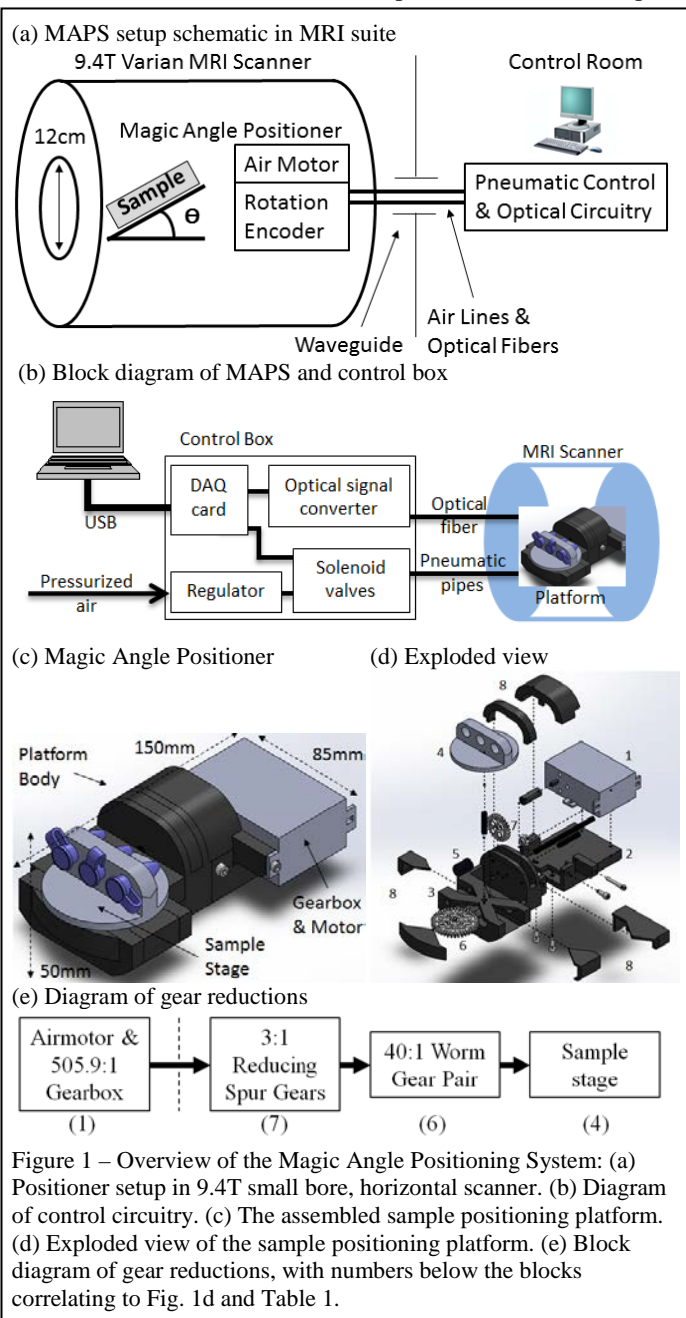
Overview of the Magic Angle Positioning System: (a) Positioner setup in 9.4T small bore, horizontal scanner. (b) Diagram of control circuitry. (c) The assembled sample positioning platform. (d) Exploded view of the sample positioning platform. (e) Block diagram of gear reductions, with numbers below the blocks correlating to Fig. 1d and Table 1.
